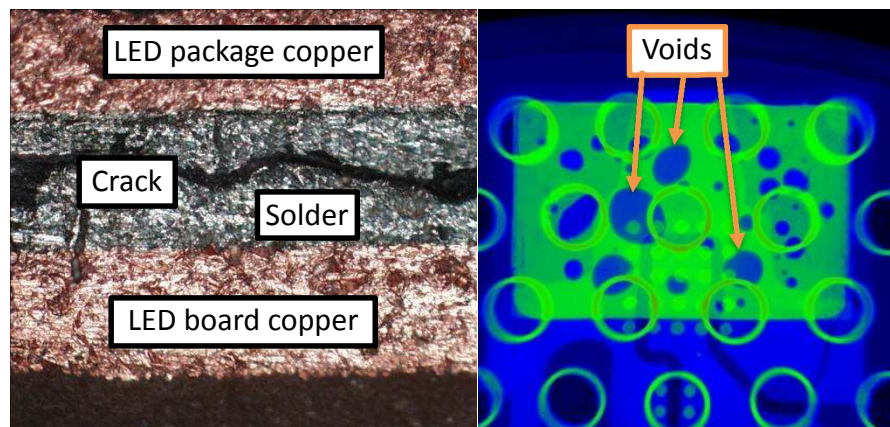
a) Crack in solder layer; b) X-ray image of voids in solder pad
